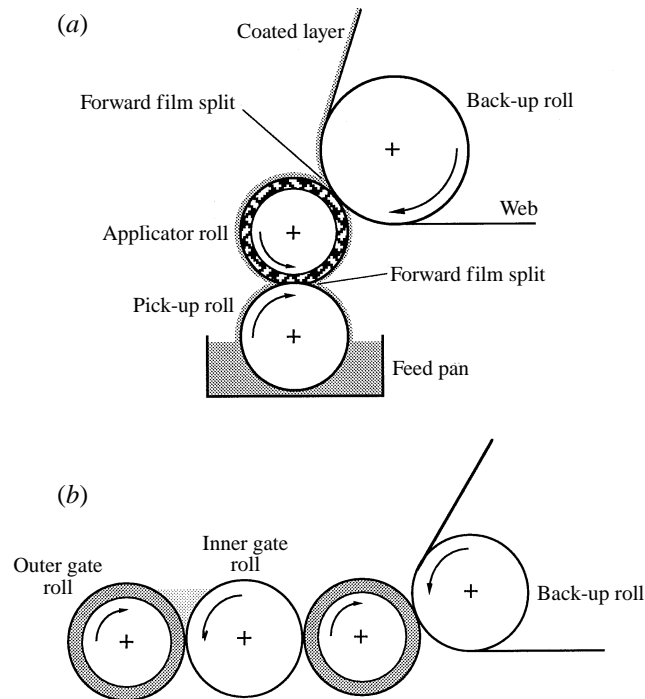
Examples of forward roll coaters. (a) Three-roll transfer coater with feed pan. (b) Four-roll transfer coater with feed pond.
